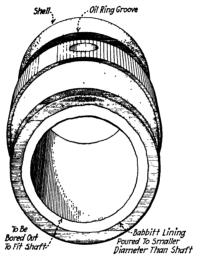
Bearing shell with babbitt lining poured, ready for fitting and finishing.
